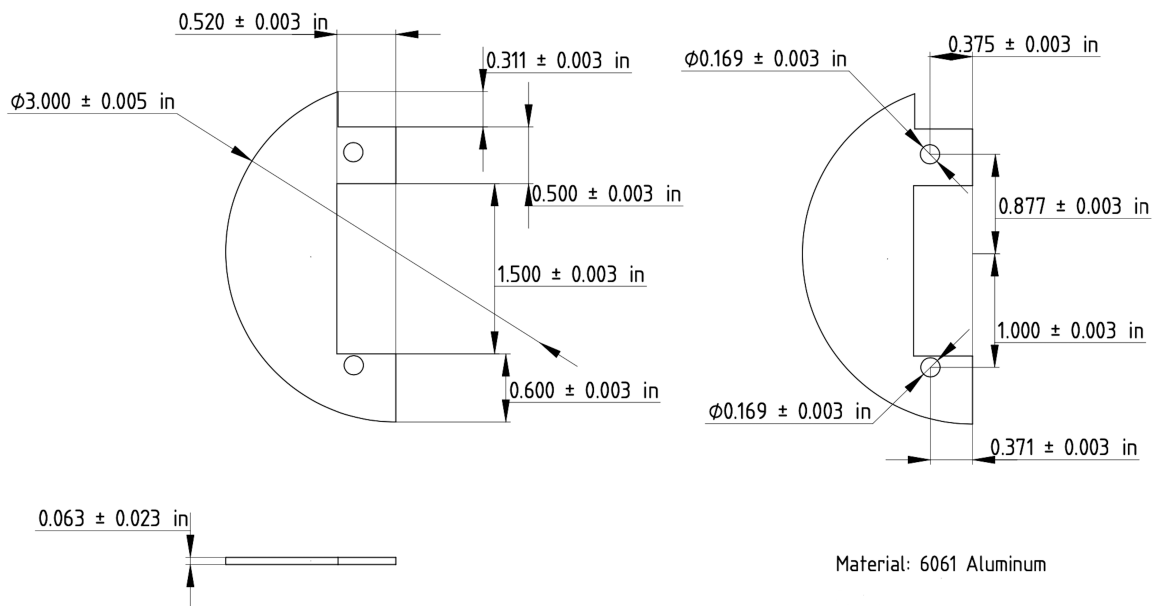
Engineering drawing of left baffle made of 6061 aluminum. Units are in inches.
